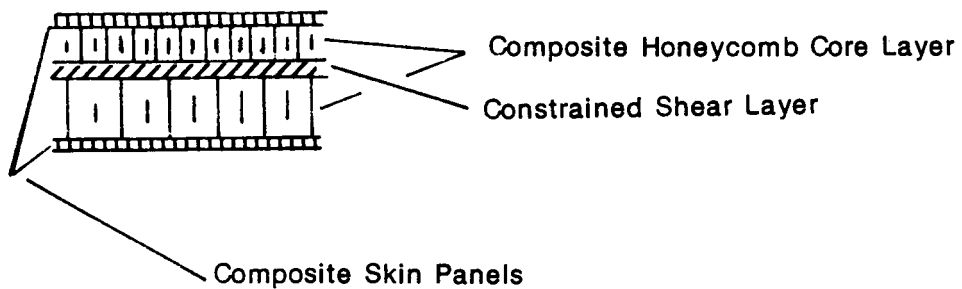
Typical Double Honeycomb Constrained Layer Damping Composite Panel Cross Section
